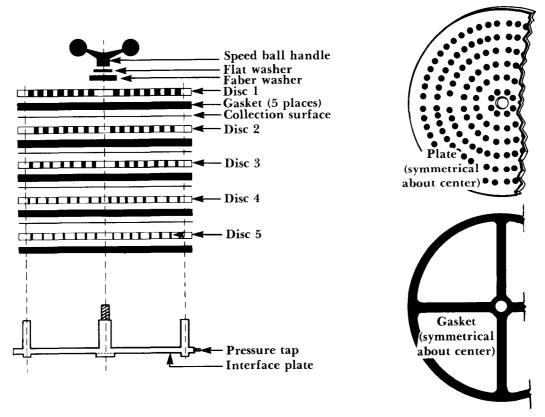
Expanded view of hi-vol Andersen impactor.
